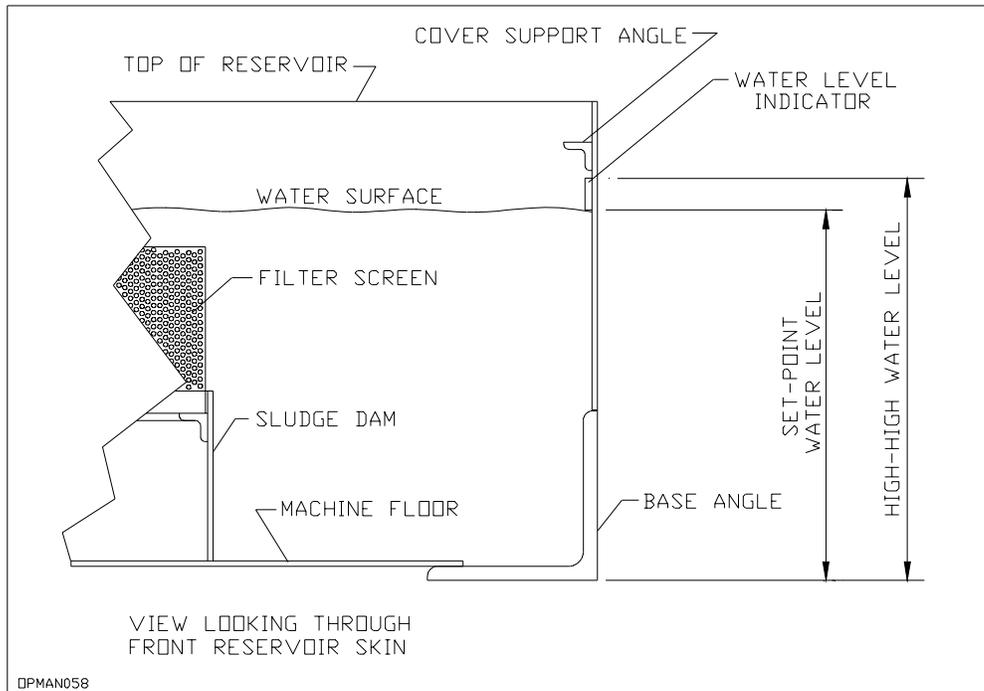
18: Water-Level Set-Point Dimensions and Measurement Location
